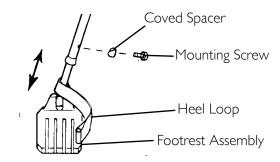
Adjusting Footrest Height - 60° MFX, 70° Taper
